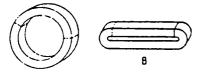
Location of Transverse Tension Test Specimen in Ring Cut from Tubular Products
